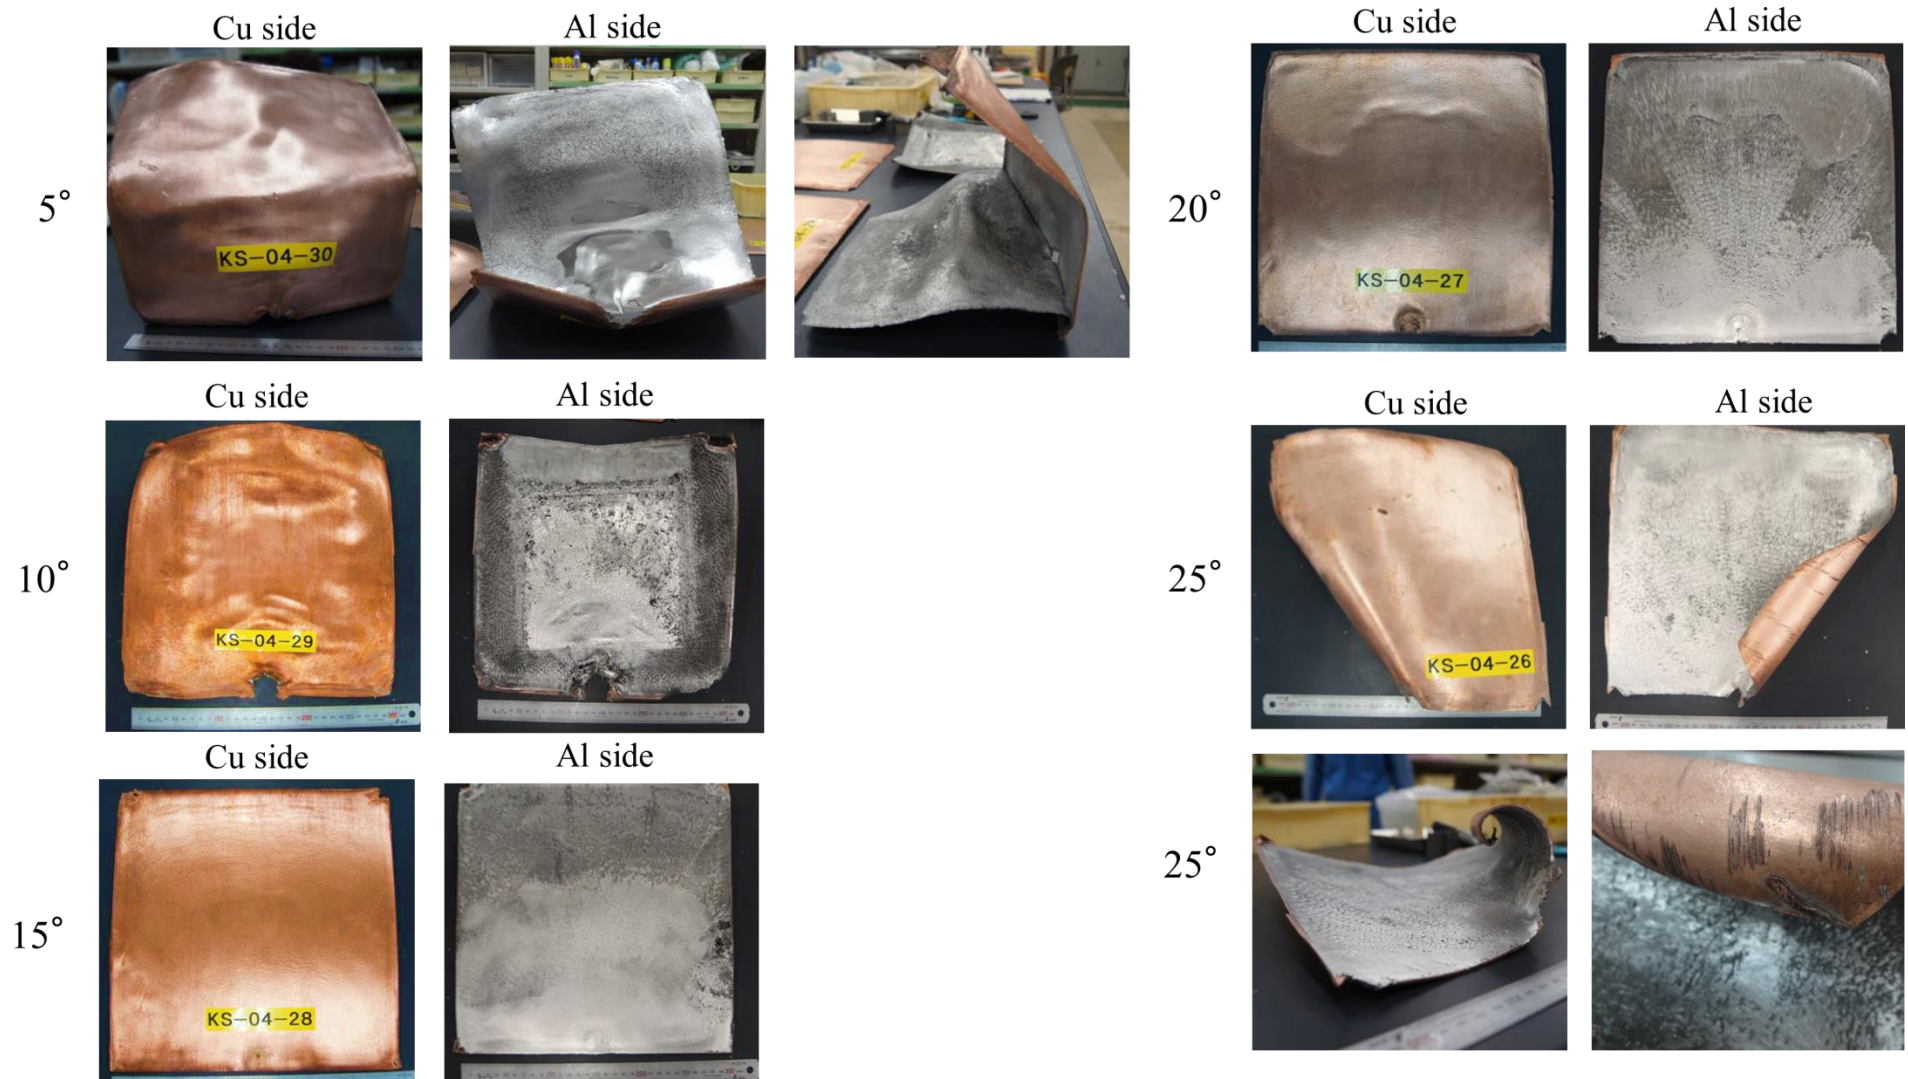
2 Outlook of the explosive welded Cu/Al joint under each condition.
